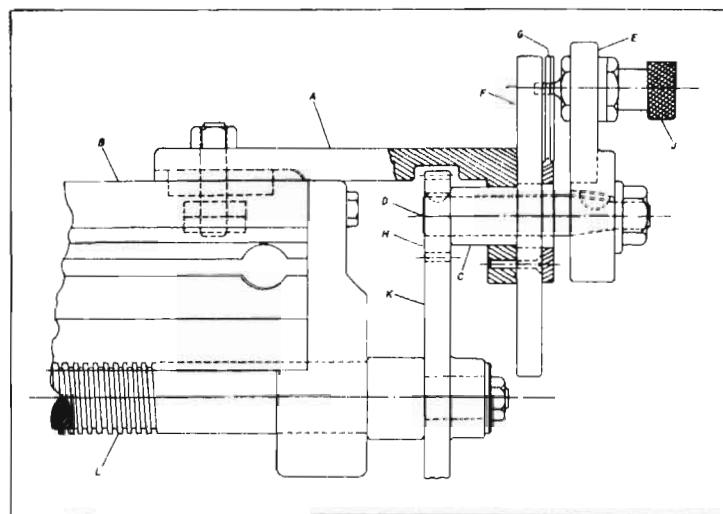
This attachment for the milling machine facilitates rack-cutting. The same gears can be used to produce racks in all commonly used diametral pitches.
